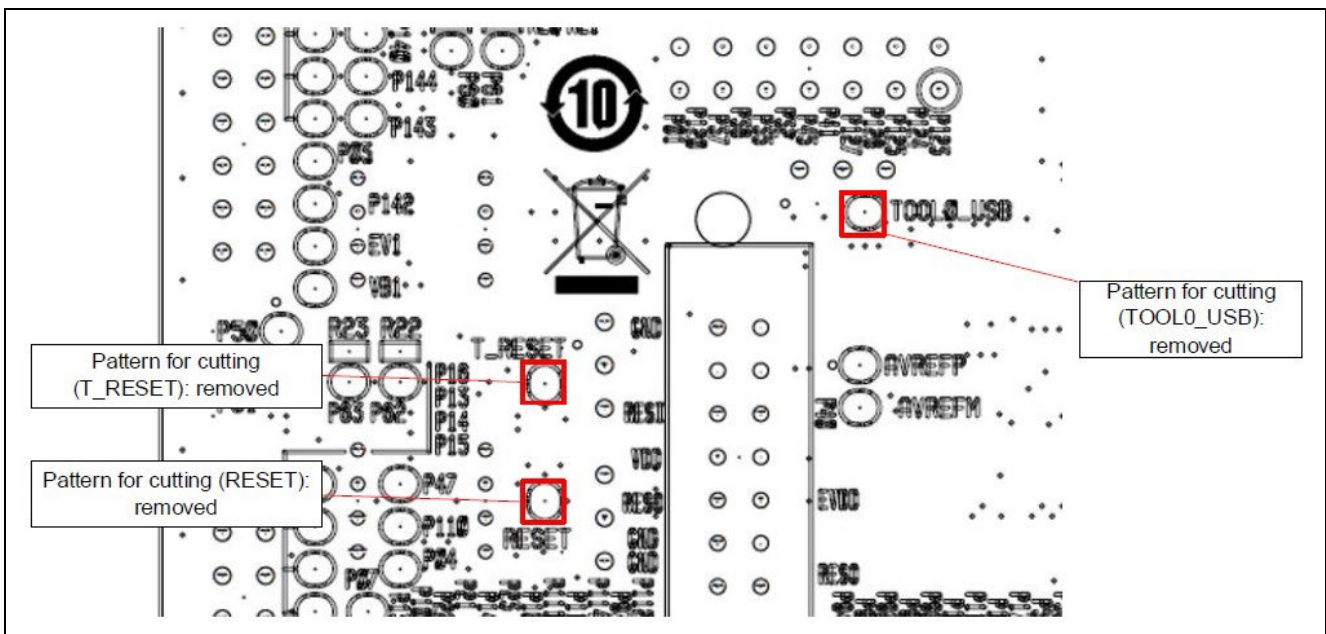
Settings for Use with the Emulator Connector on the Soldered Side
